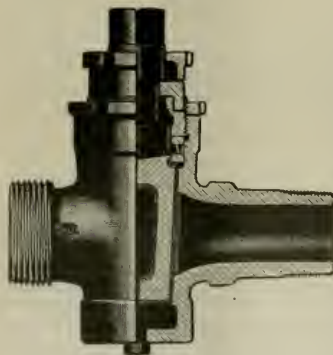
SECTIONAL VIEW OF BORDO BLOW-OFF PLUG VALVE.
